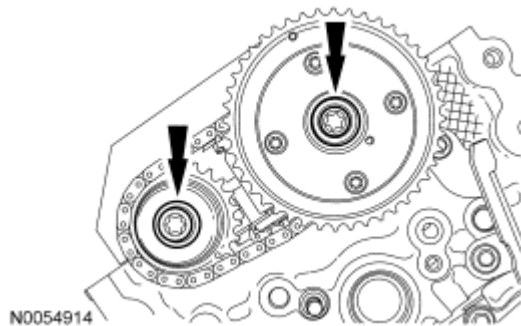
Locating RH VCT Assembly Bolt & RH Exhaust Camshaft Sprocket Bolt
